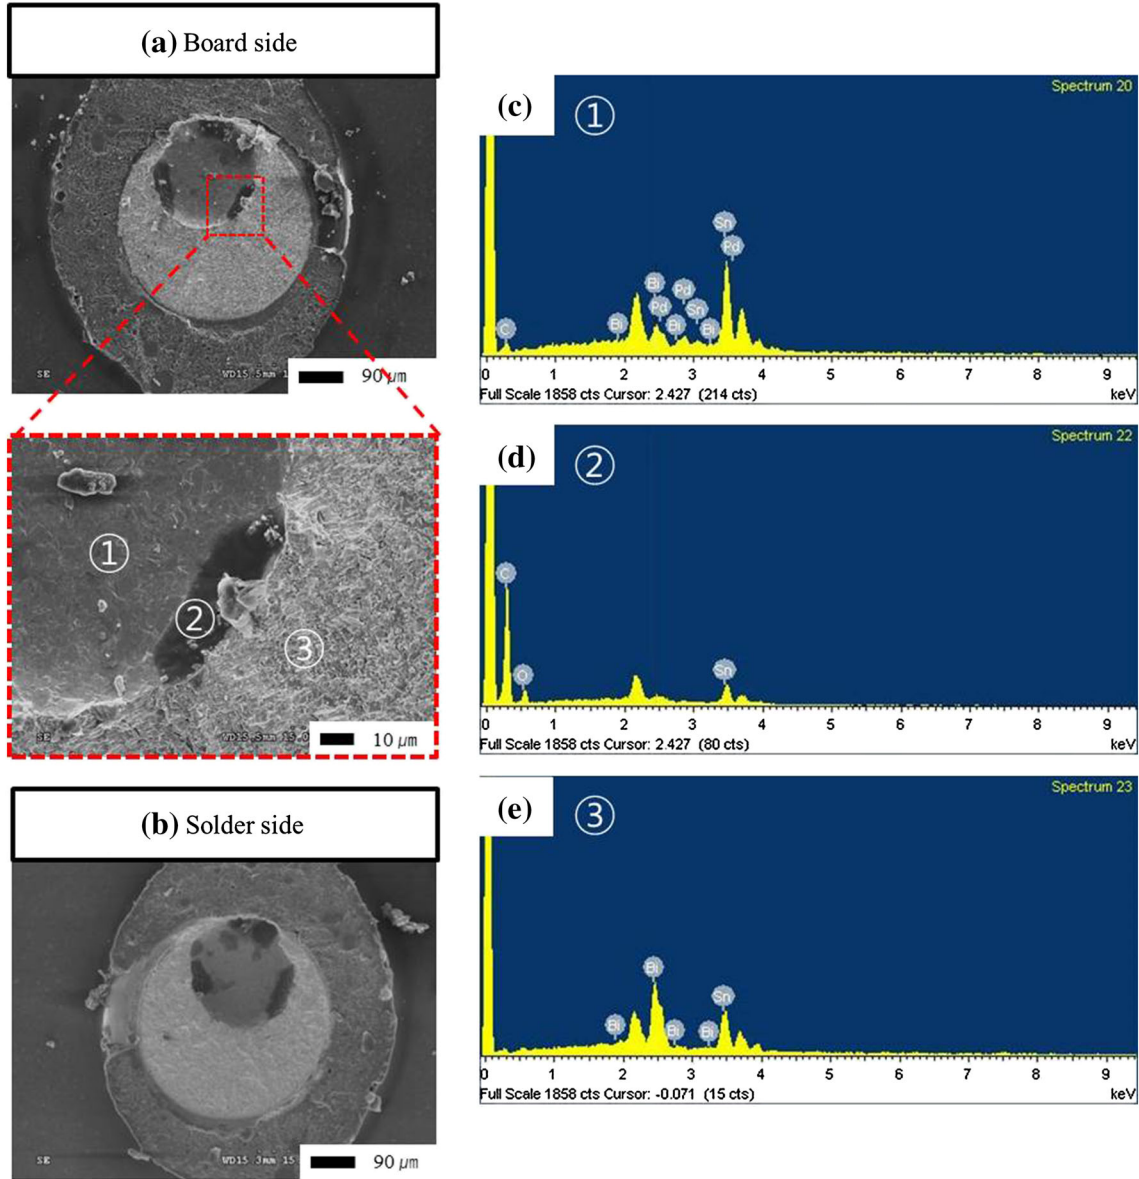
SEM micrographs of fracture surfaces after drop tests with EDS spectra collected from the corresponding positions (sample: SBE-ENEPIG); (a) board side, (b) solder side, (c) IMC layer, (d) carbon trace, (e) Sn-Bi solder.
